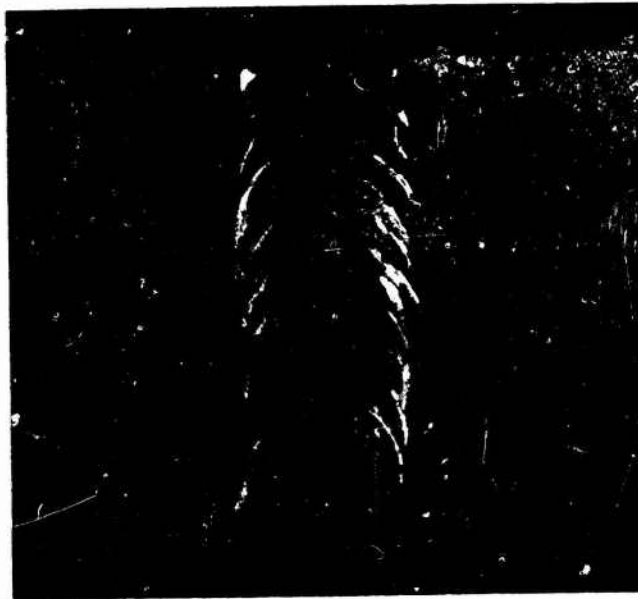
Acoustical HNDT Image of Flaws in 1/2-Inch Stainless Steel Butt Weld.
